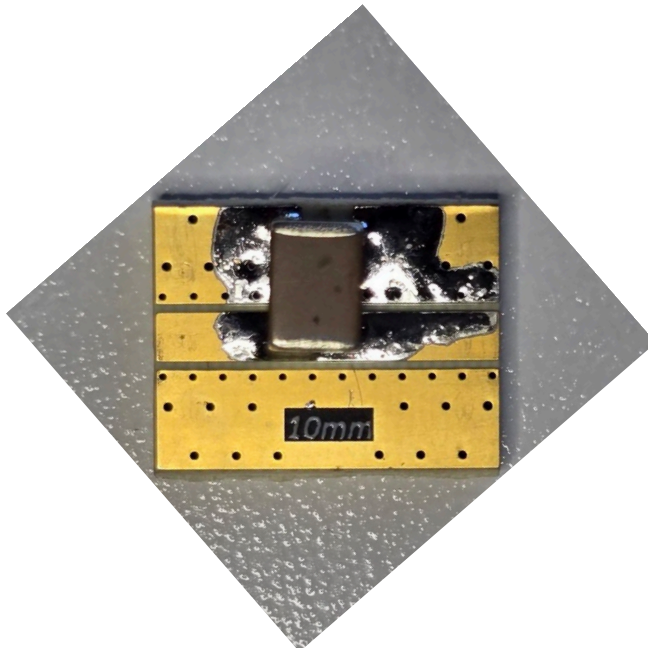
Soldered 1210 part covers the top and middle rows. You don't need to solder directly to the pads. Contact should be made with the top and middle planes and the part is centered.
